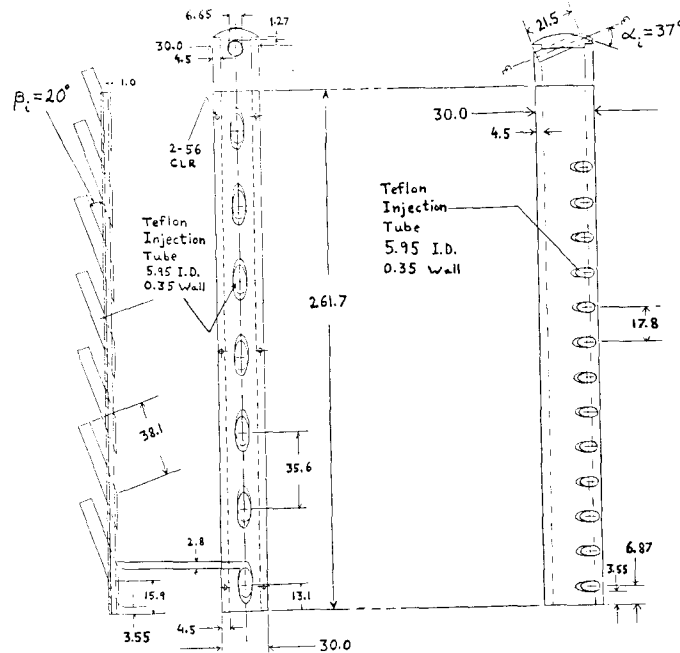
(b) A removable section with spanwise injection holes (dimensions in millimeters)
